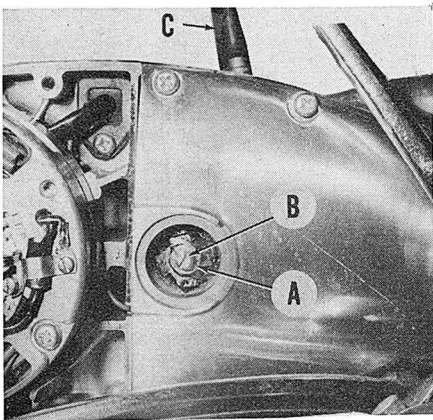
After adjusting clutch cable to zero slack, turn adjuster (B) to obtain 5/32 inch free play in clutch lever pivot.
